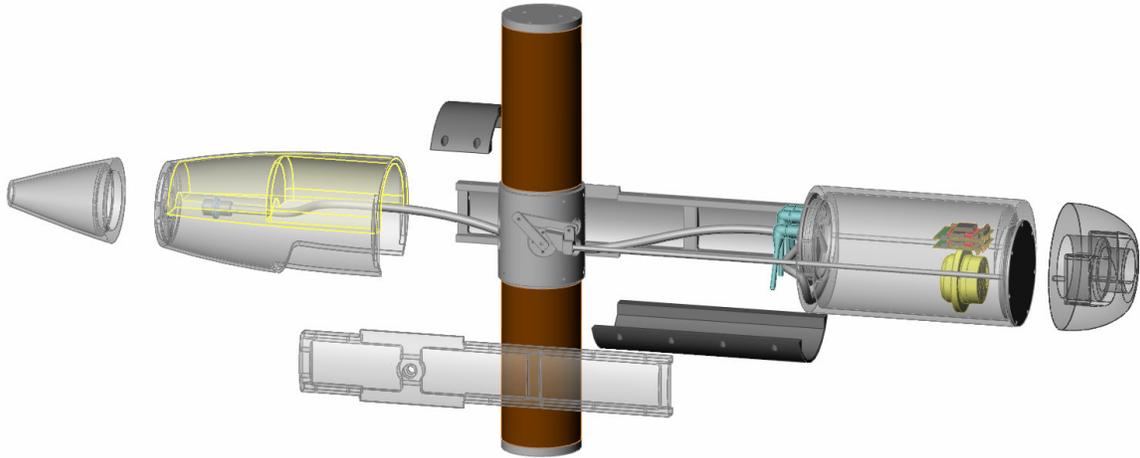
VTB Rev B Mechanical Concept, exploded view
